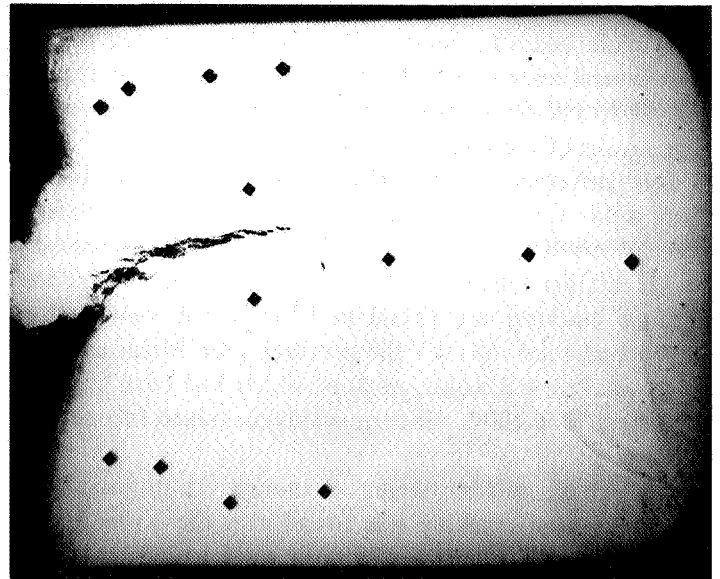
Root cracking in E weld (mag. 3x).
